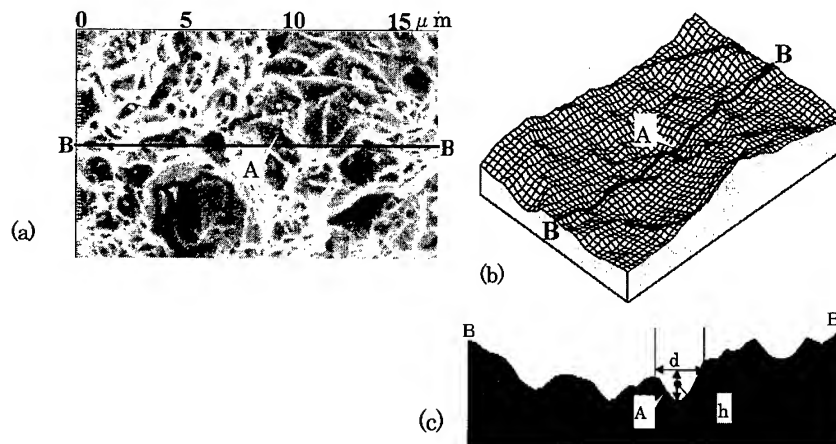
3-Dimensional Imaging of SEM Fracture
